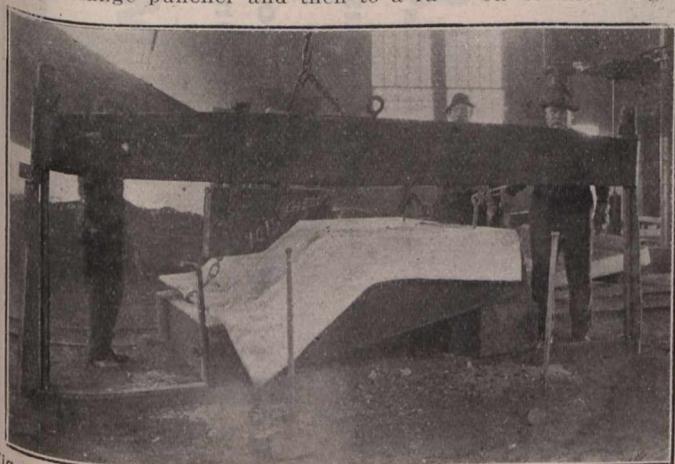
Side-flanging a Throat Sheet by Hand on a Formed Flanging Block.
